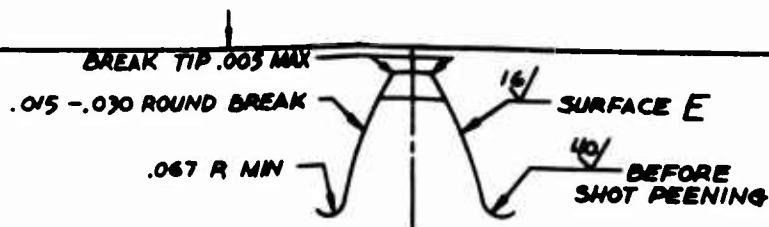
Fatigue Test Gear Configuration 11—EX-78782.
